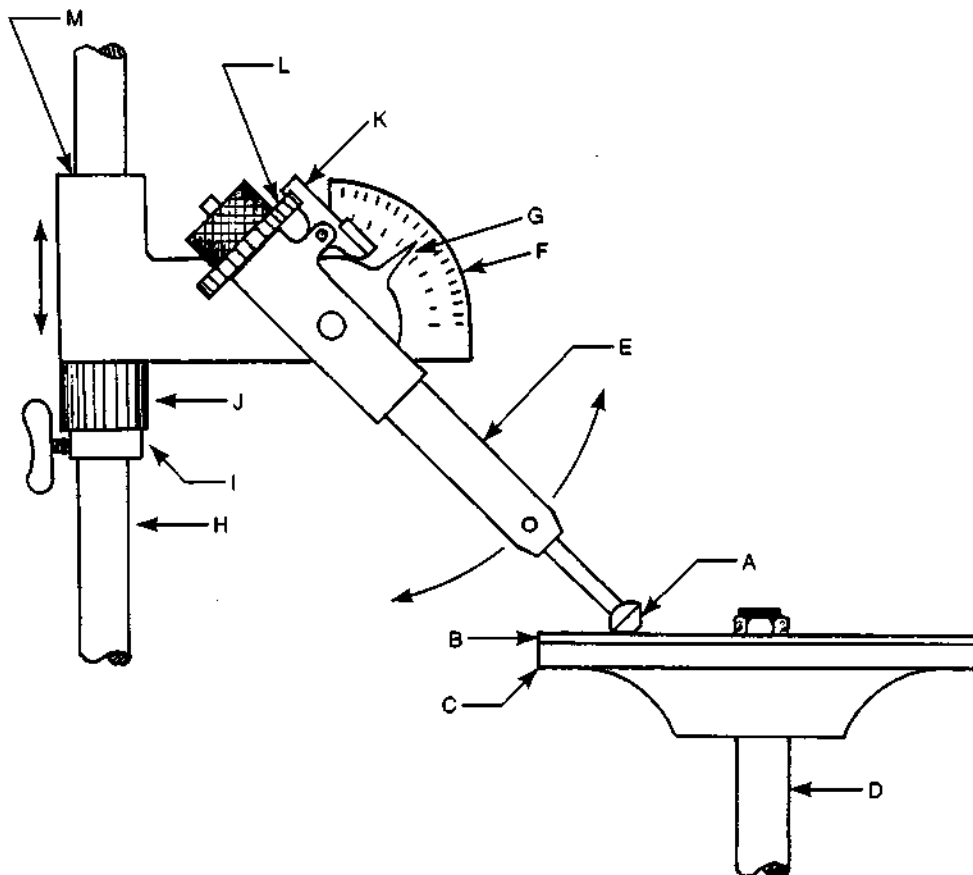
A precision-cut faceting device for gemstones: A - gemstone being faceted, B - lap, C - master lap, D - rotating lap shaft, E - drop arm that can swing up and down to vary the elevation angle, F - elevation angle quadrant, G - elevation angle pointer, H - supporting shaft, I - locking sleeve for sleeve elevation, J - fine elevation adjustment, K - rotation locking arm, L - notched gear, M - sleeve that is moved up and down as the elevation angle is changed.
